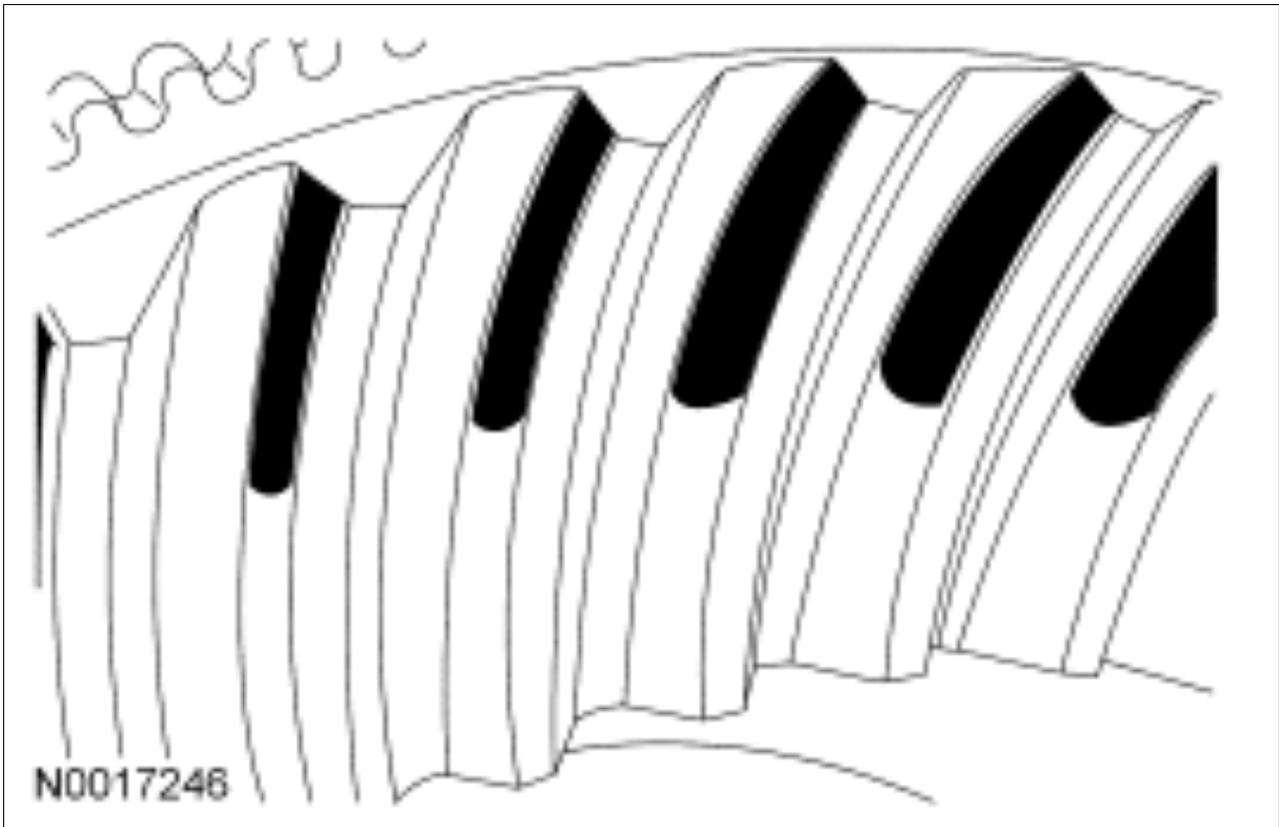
Identifying Tooth Contact Pattern (High, Thin Contact Pattern)
